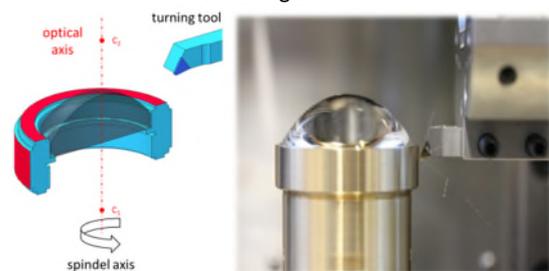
Left: machining of references (red) parallel and perpendicular to the optical axis; right: alignment turning of an asphere
